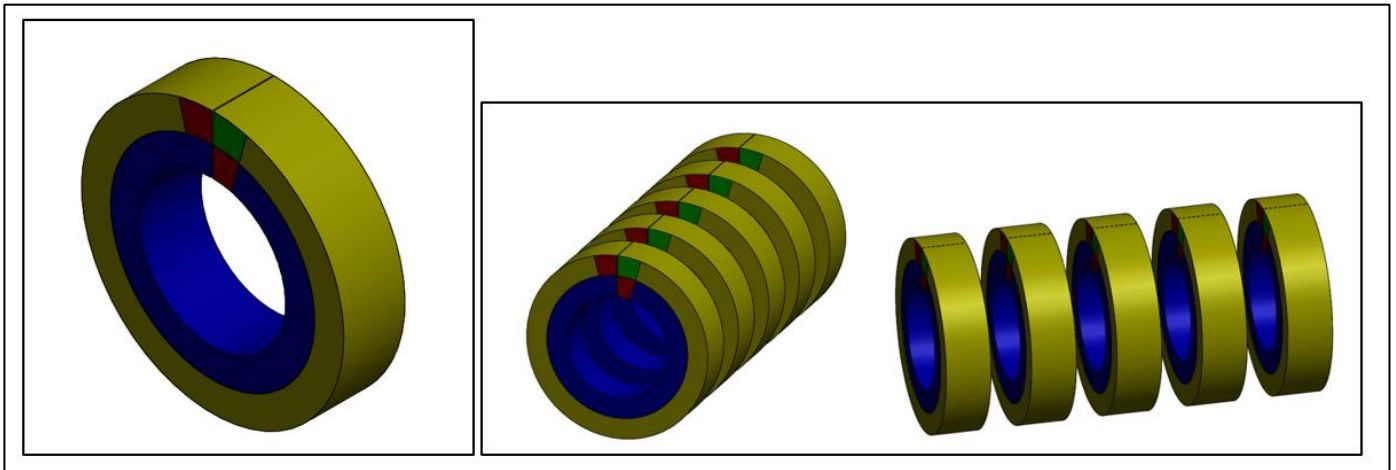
Views of coil subassembly and assembly with 5 linearly patterned coils, for proposed accelerator
